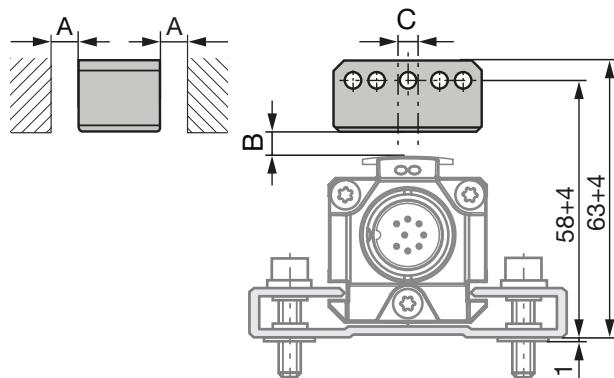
Dimensions and distances with BTL6-A-3801-2 magnet
